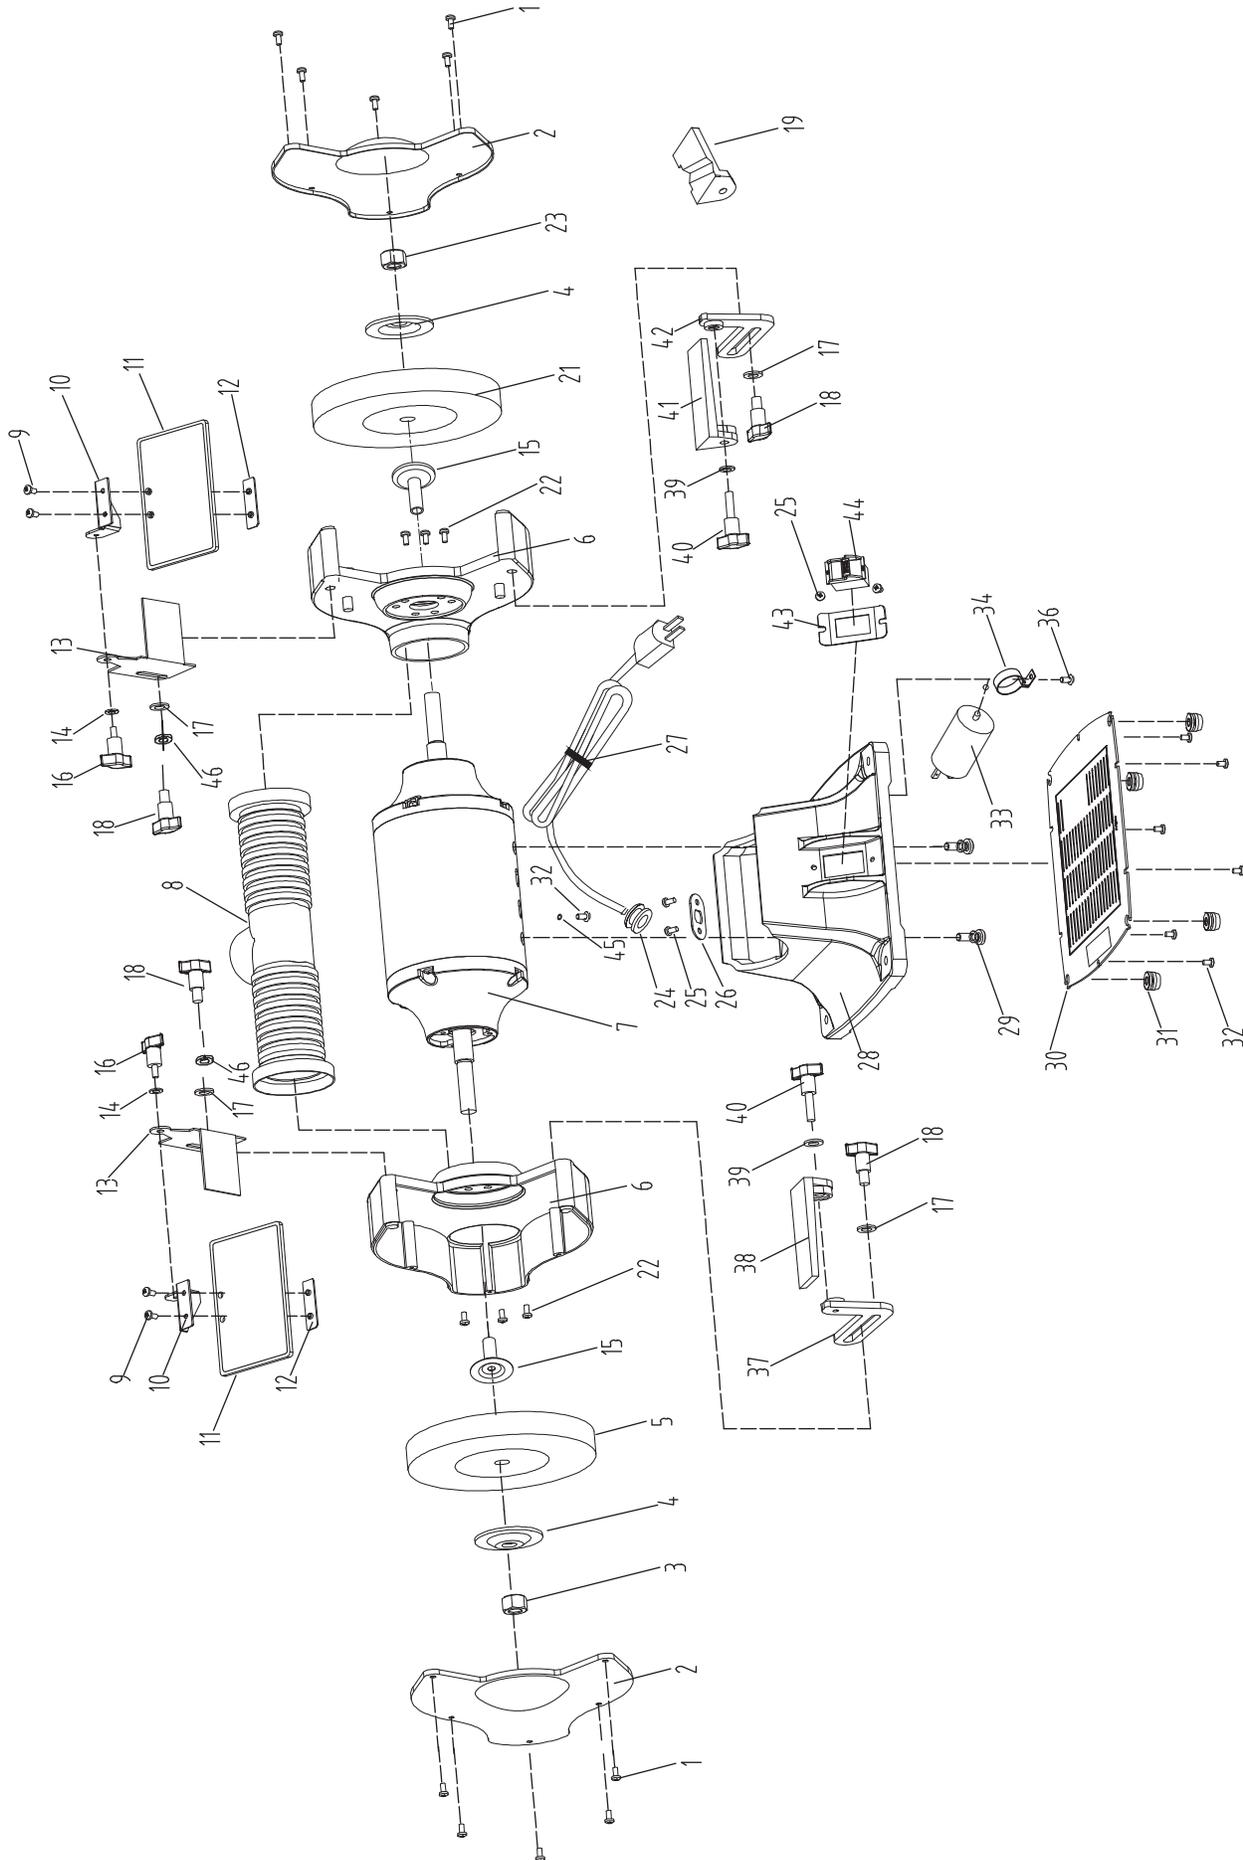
Repair Parts Illustration for 9682073A, 8" Bench Grinder
